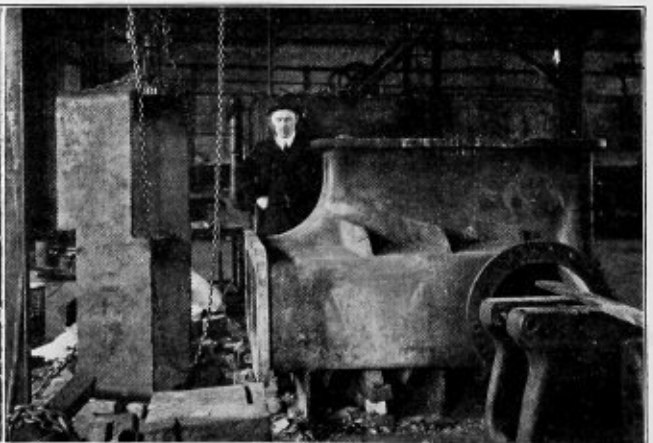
Welded Casting, Showing Section Removed
